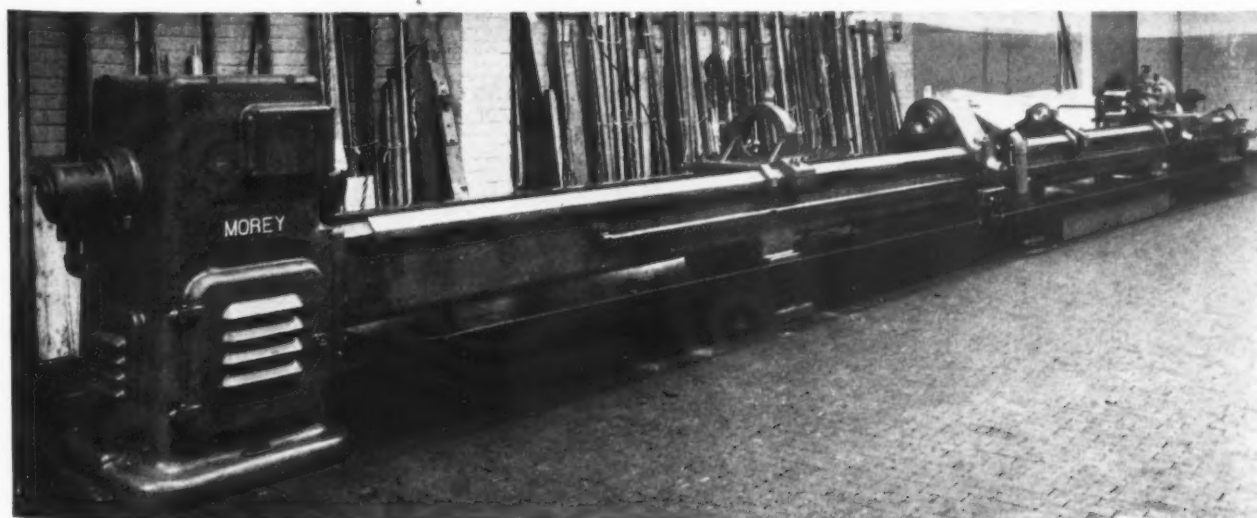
Single-spindle No. 4 1/2 Deep-hole Drilling Machine Built by Morey Machinery Co., Inc.
